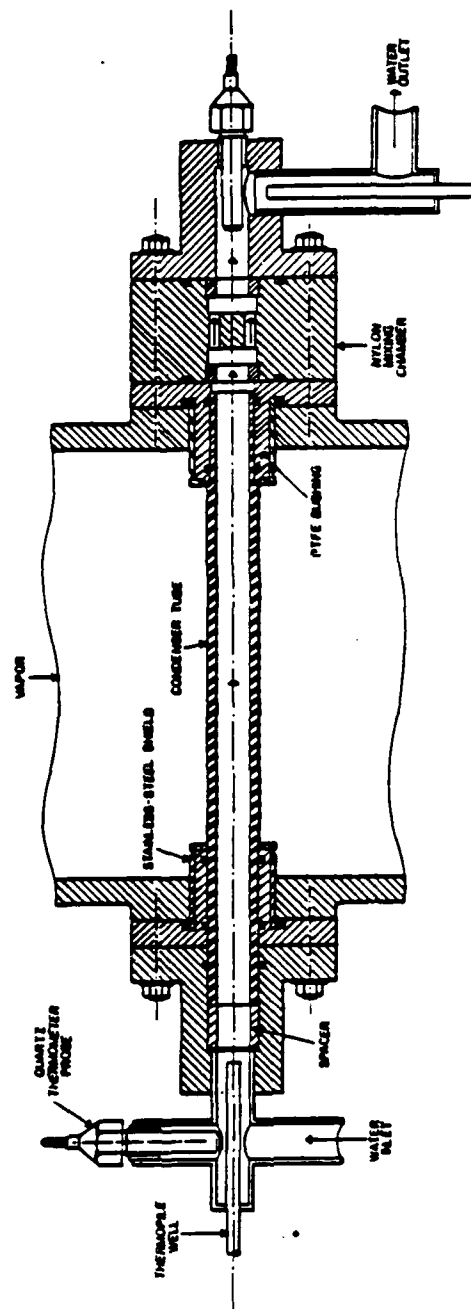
Schematic of Single-Tube Apparatus Test Section.
